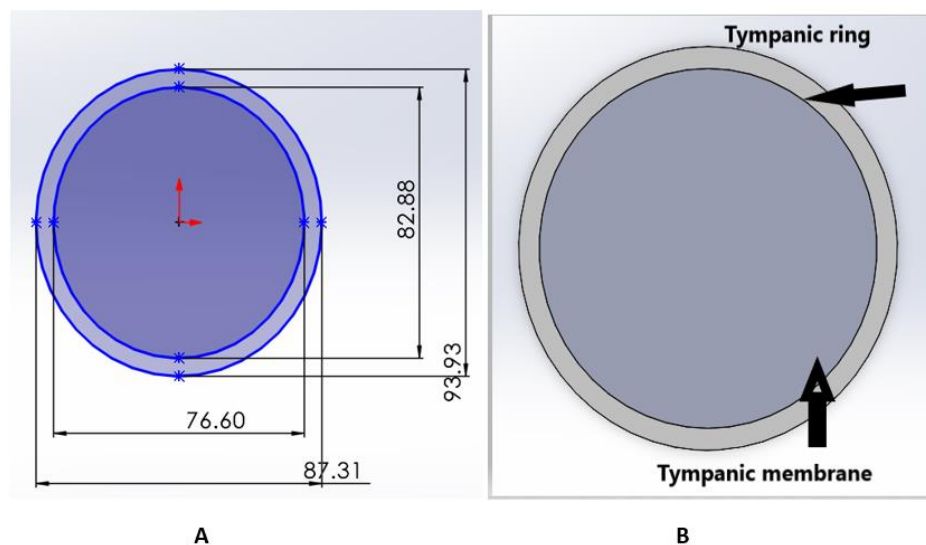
A. Dimensions of the steel tympanic ring. B. 3D CAD model of prototype of TM
